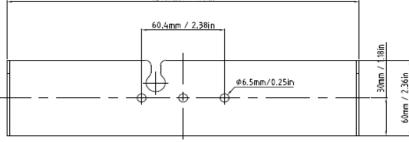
i-DT61XWE Mounting Bracket Dimensions
